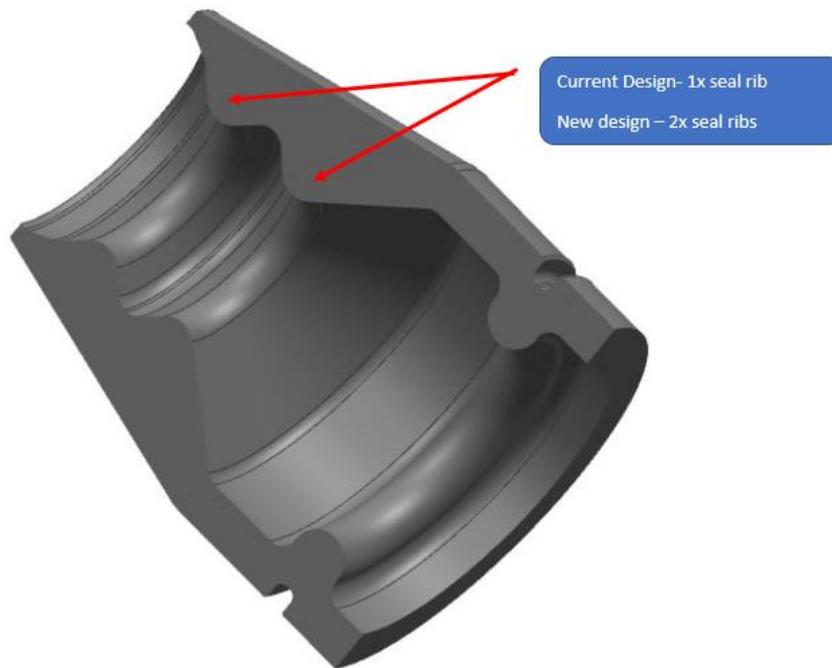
New grommet cross-section / Nouvelle section transversale du passe-fil
